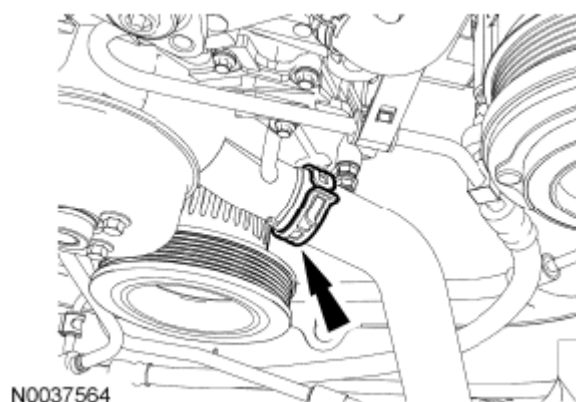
Locating Lower Radiator Hose From Coolant Pump
